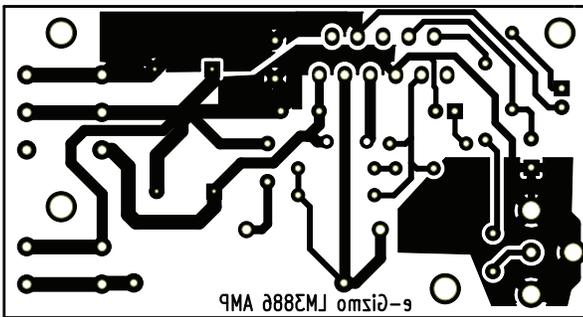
This is the initial PCB copper pattern used in the prototype.
